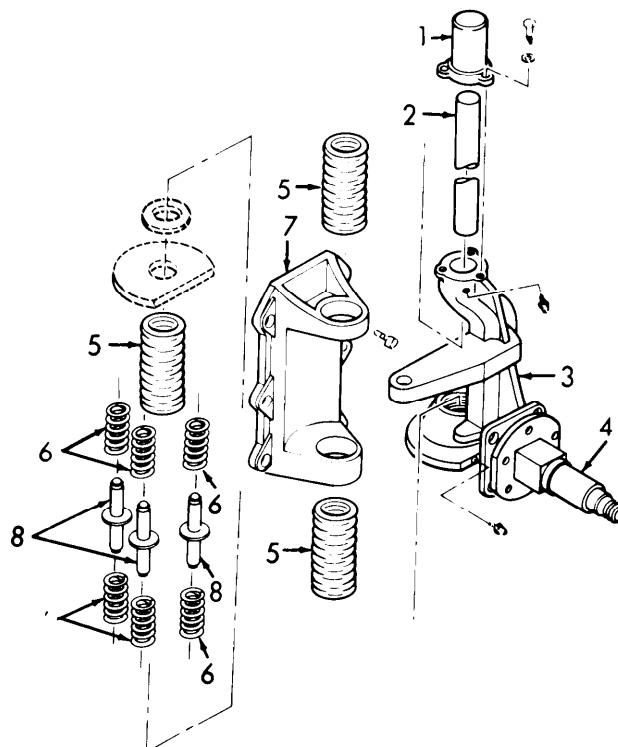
Shock Absorbing Spring Assembly, Inspection.
